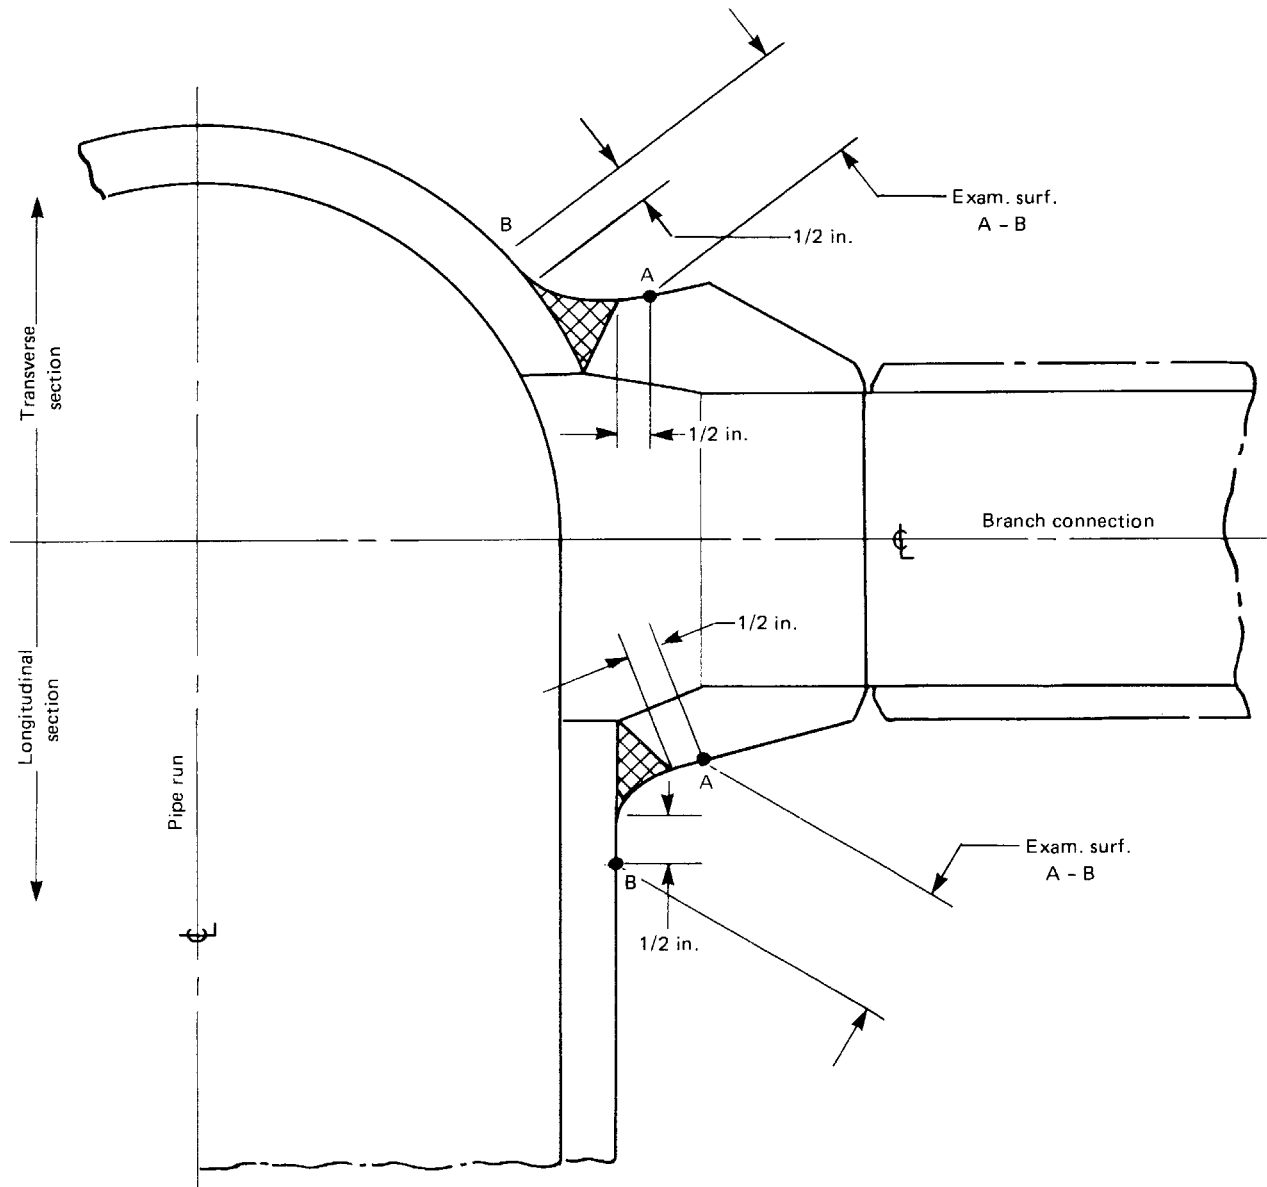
PIPE BRANCH CONNECTION
